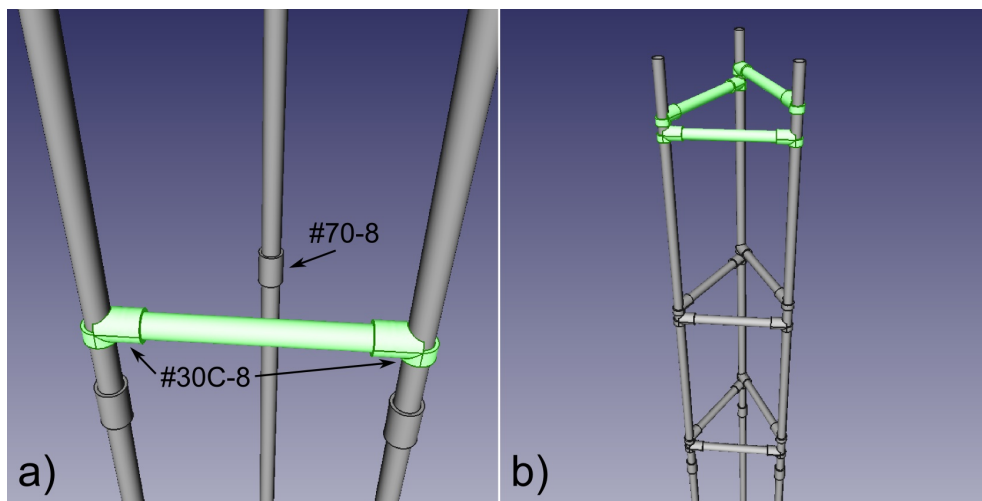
A cross brace element of the tower is displayed in (a) and the whole tower setup in (b).
